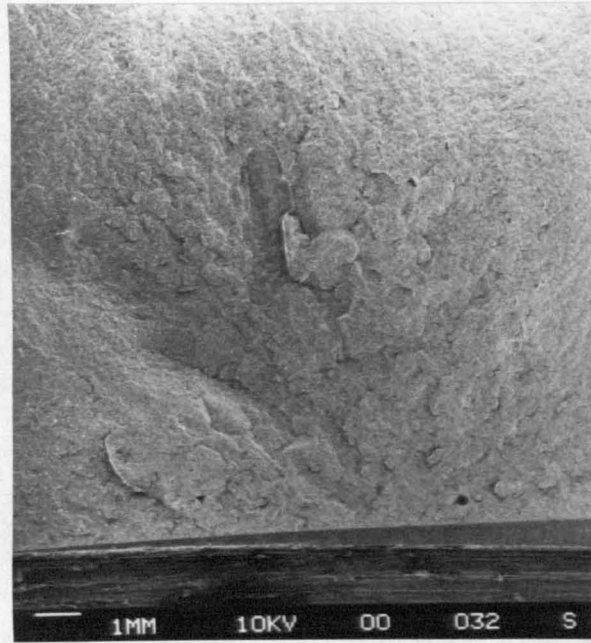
Typical fracture surface of J tested specimen showing three distinct zones. Zone (I) machined notch, zone (II) sharp notch, and zone (III) investigated fracture process area.
